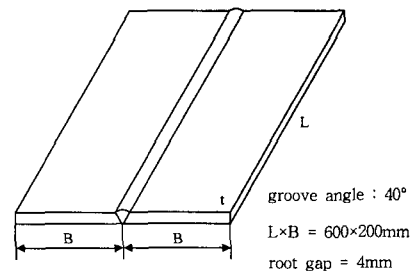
Dimension of multi-pass butt welding model with V-groove
